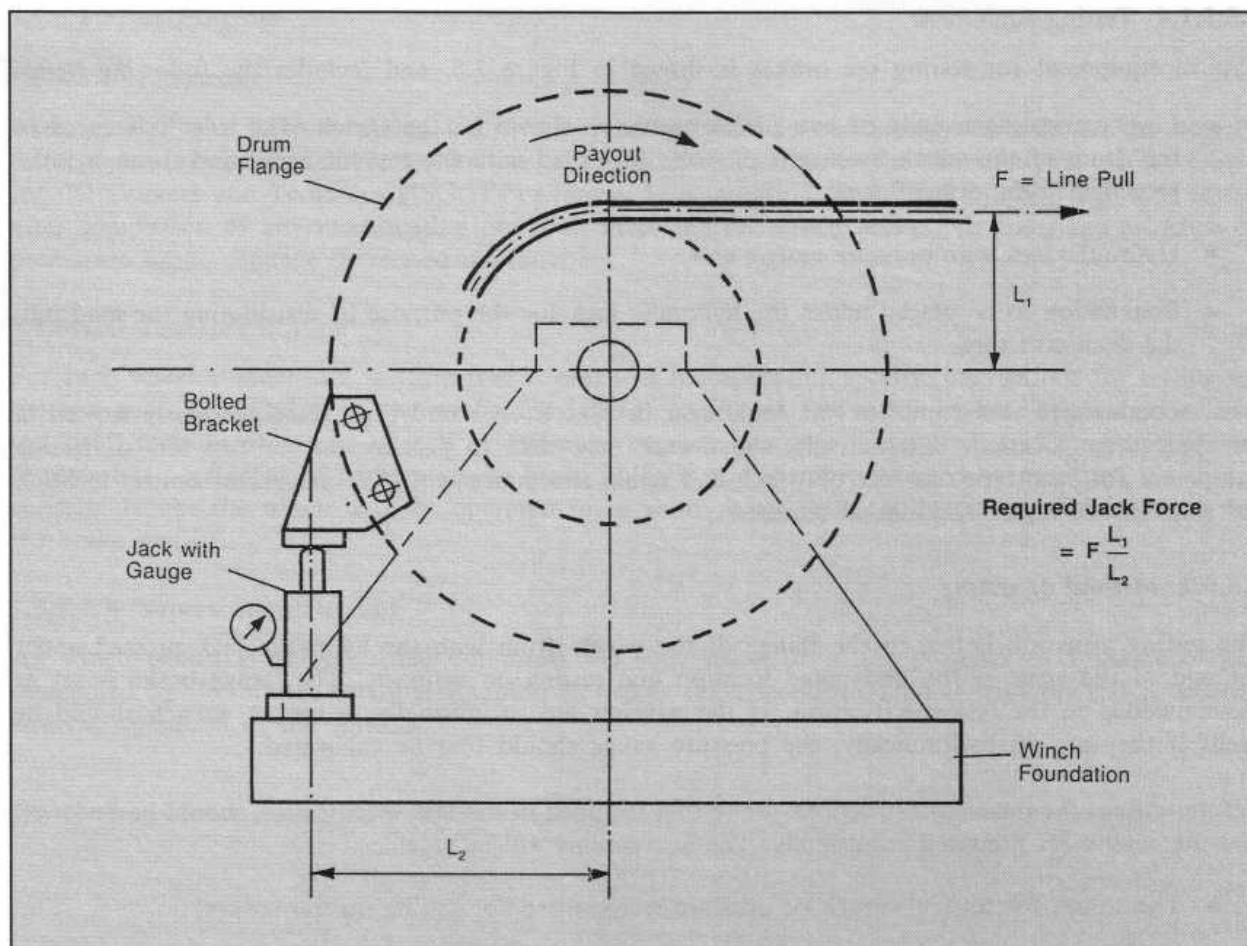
SIMPLIFIED BRAKE TEST KIT
